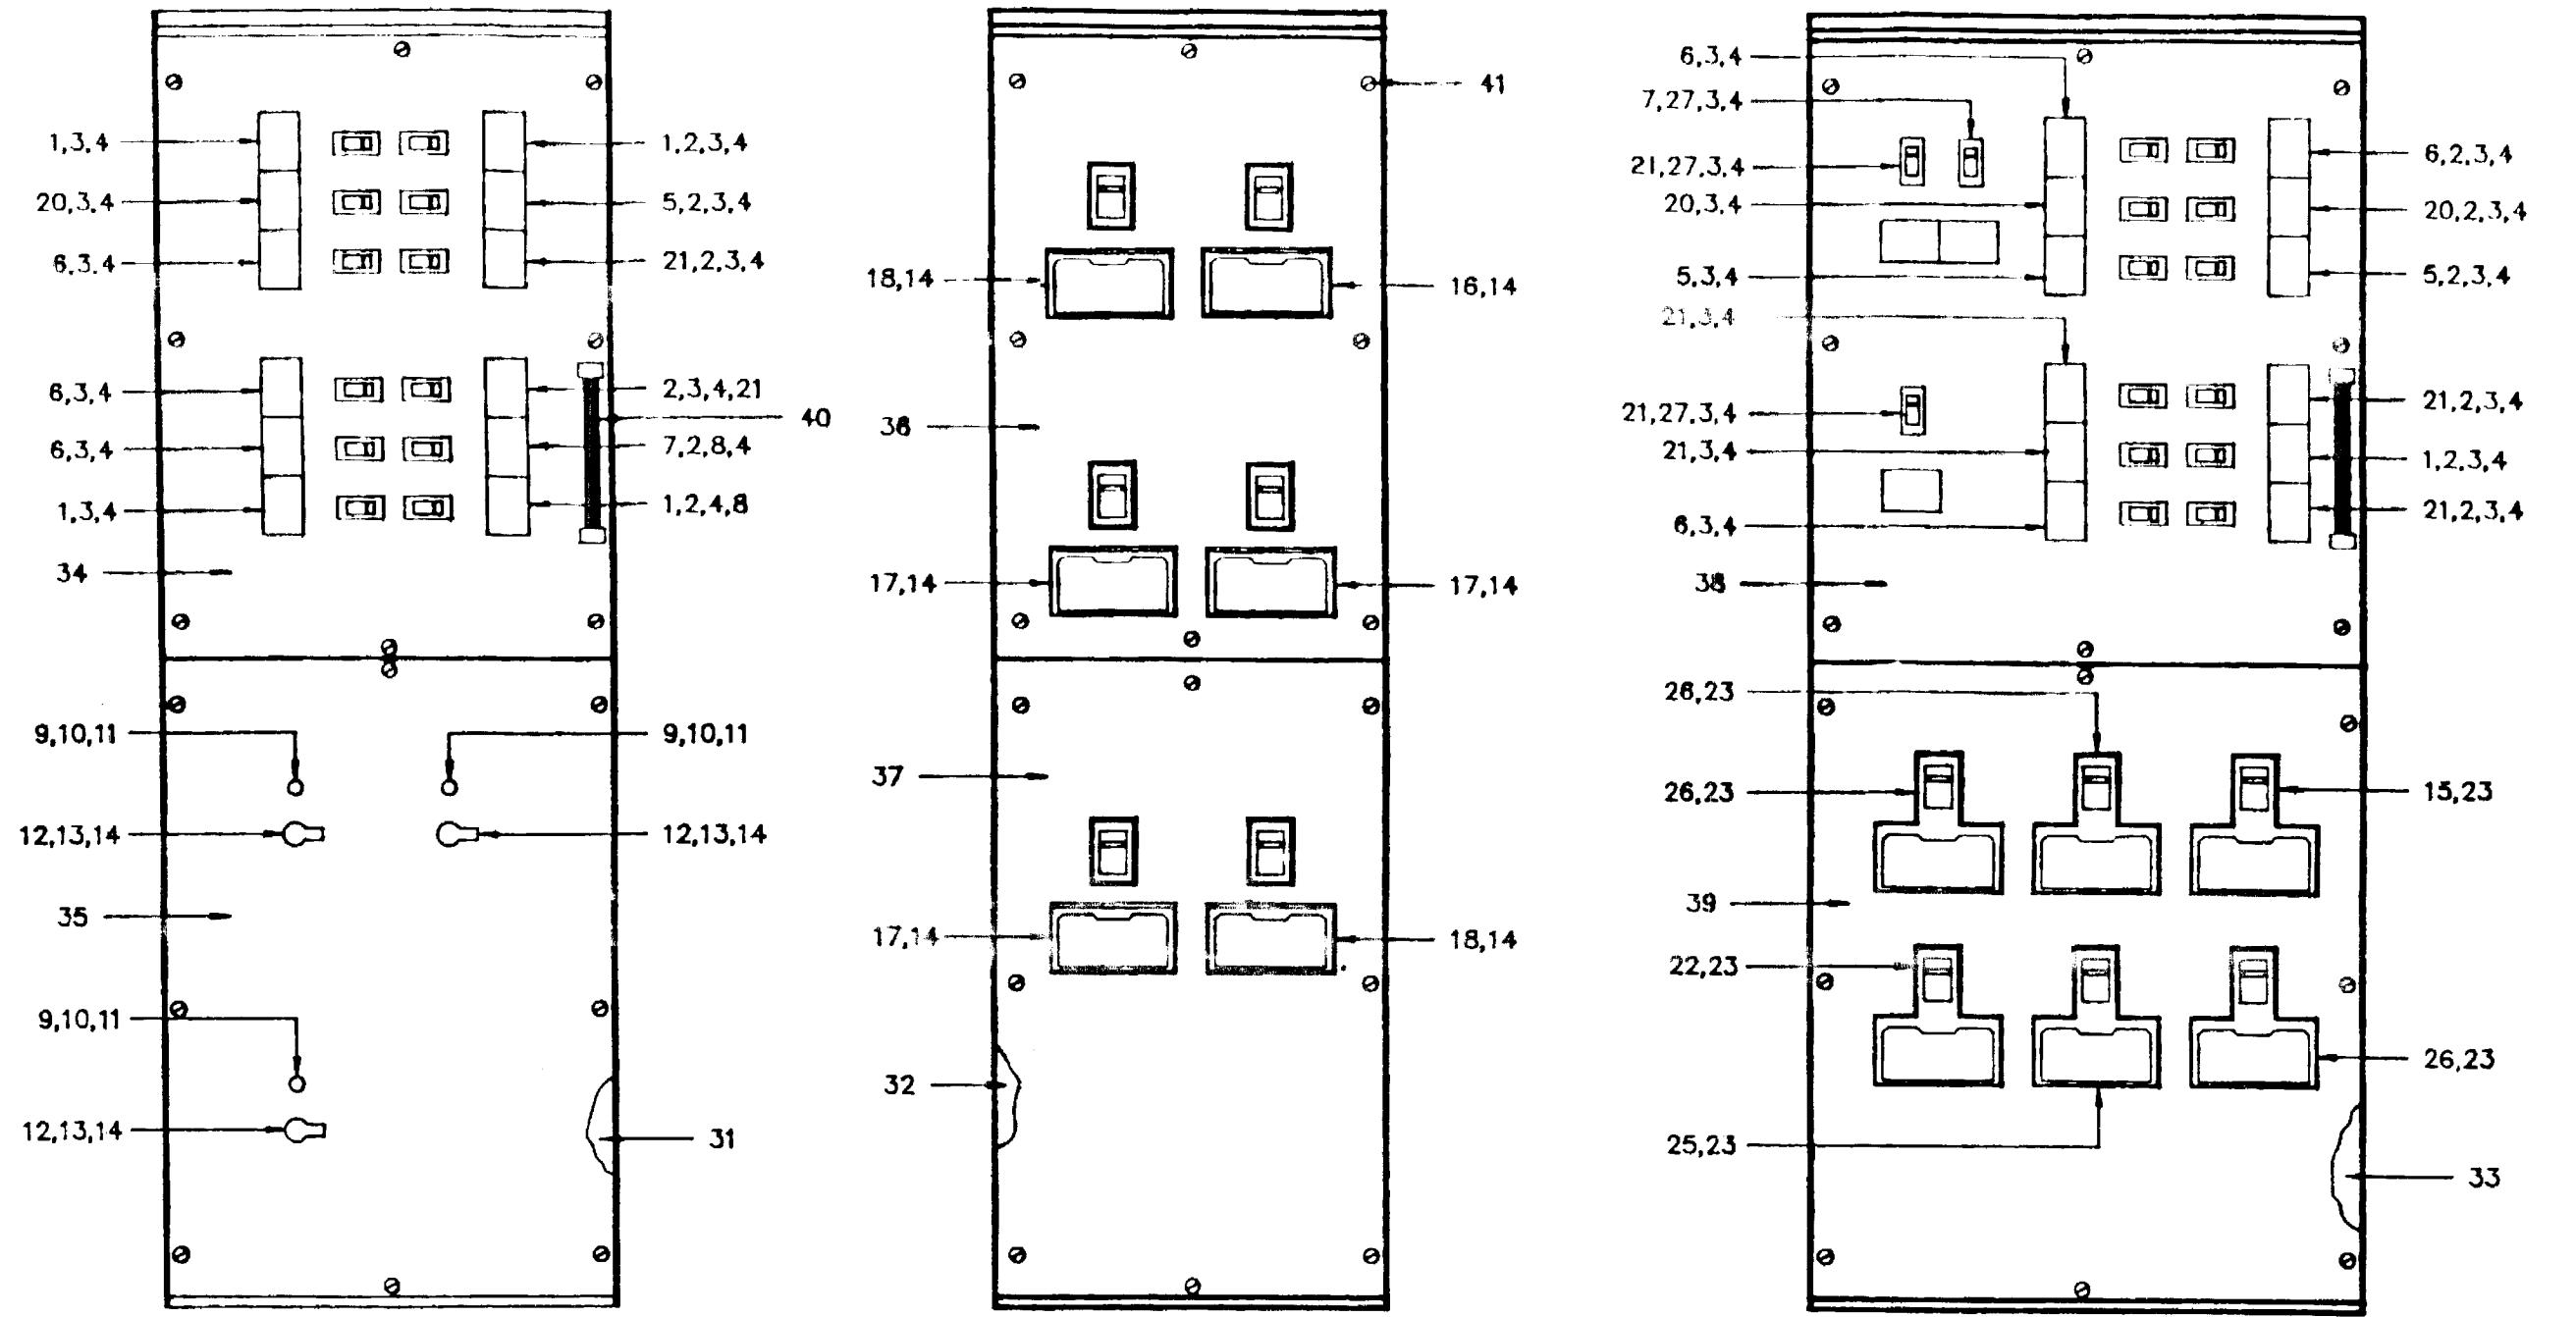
3SA Switchboard Assembly (Sheet 3 of 3)
